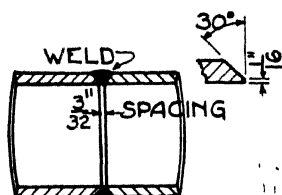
Plain end joint without liner, now used extensively for oil lines as large as 12 in. Three beads are required.
